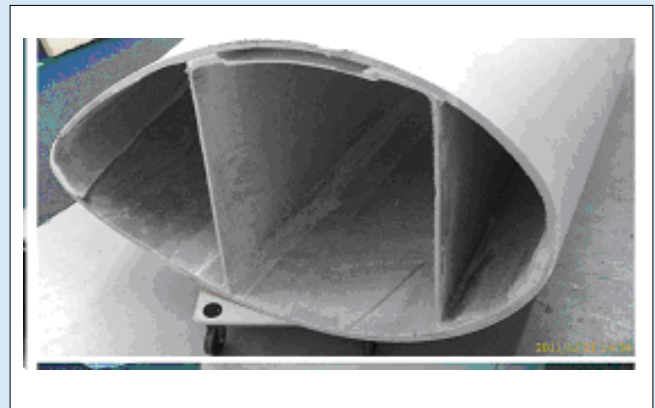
Test piece, cross-sectional image (bonding defect on the stringer)
